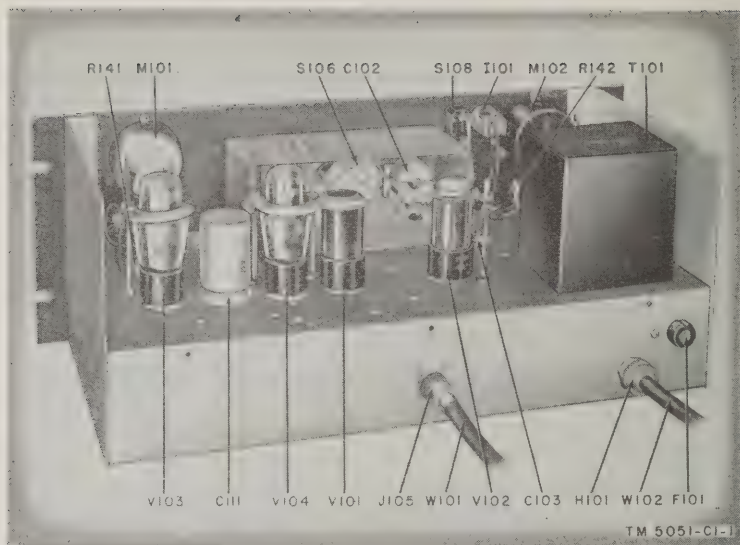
(Added) Panel and chassis assembly, rear view, (TS-330/TSM (6883-Phila-51)).
